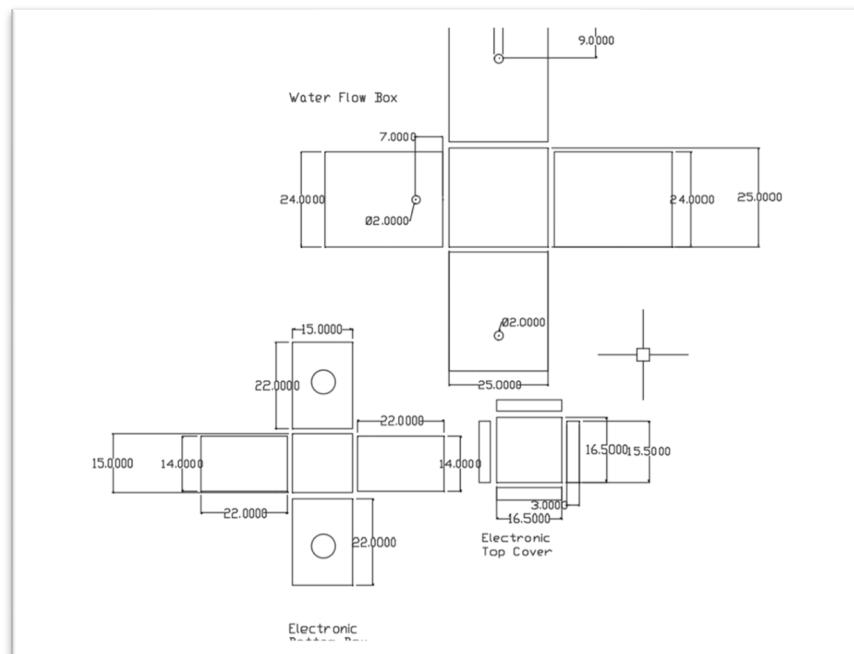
Drawing file R12 used for laser cut machine (Perspex)
